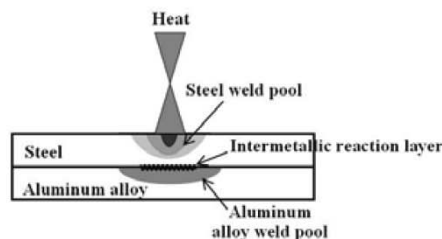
Schematic of the interface during dissimilar metals welding between steel and aluminum alloy.
